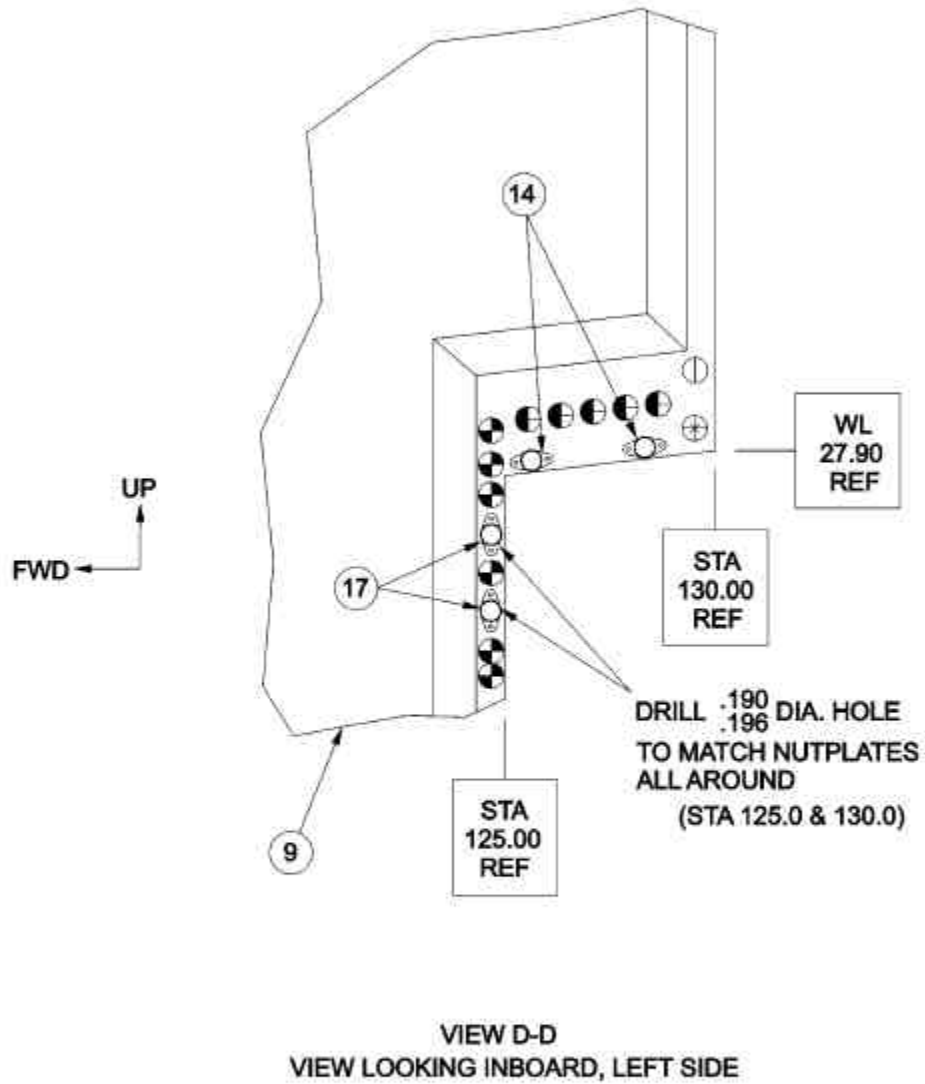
Support assembly 206-031-301 and 206-031-302, installation of (Sheet 4)
